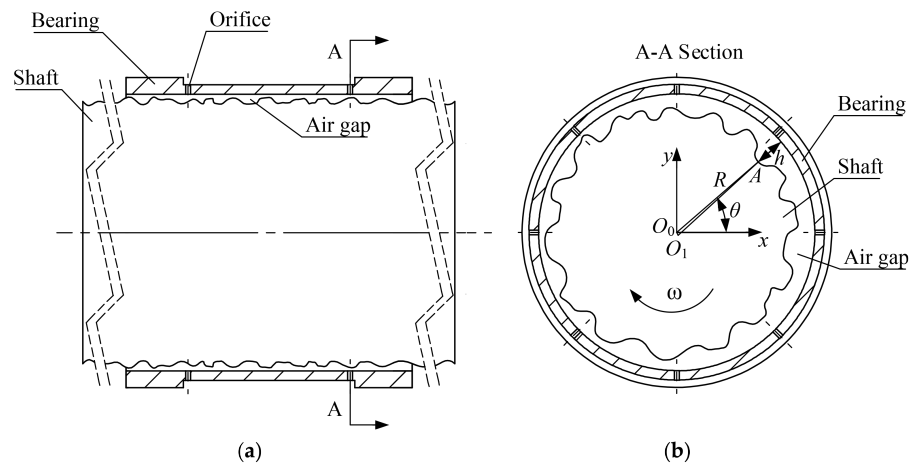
Illustration of the aerostatic journal bearing with shaft shape errors: (a) axial direction; (b) circumferential direction.
